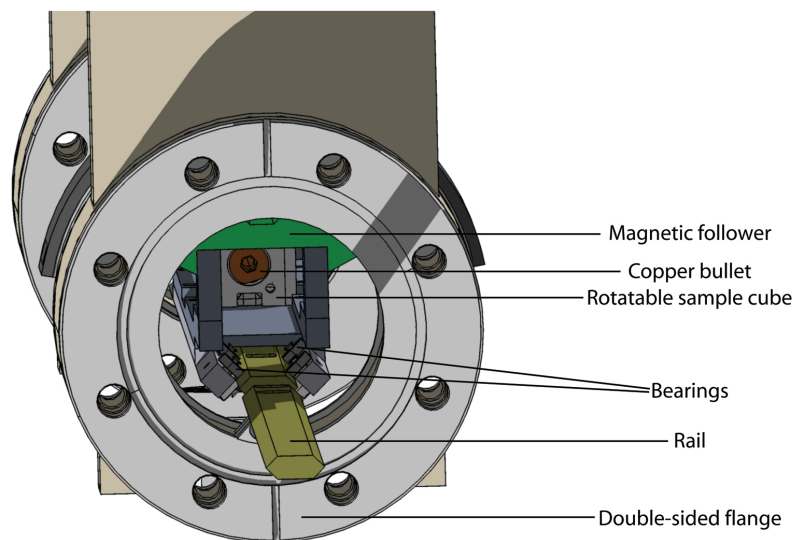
A view down the flange, showing how the cart bearings hold the cart captive on the rail.
